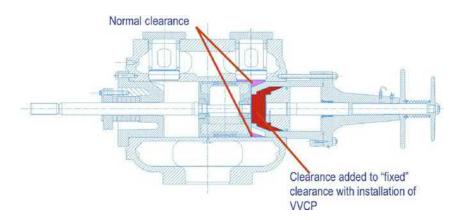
Sectional view of a compressor cylinder with a variable volume clearance pocket.
